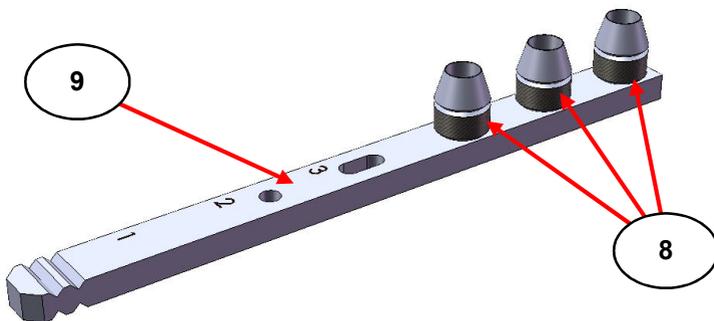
Minidiff Plus Sample Cups on Mount Holder Assembly
